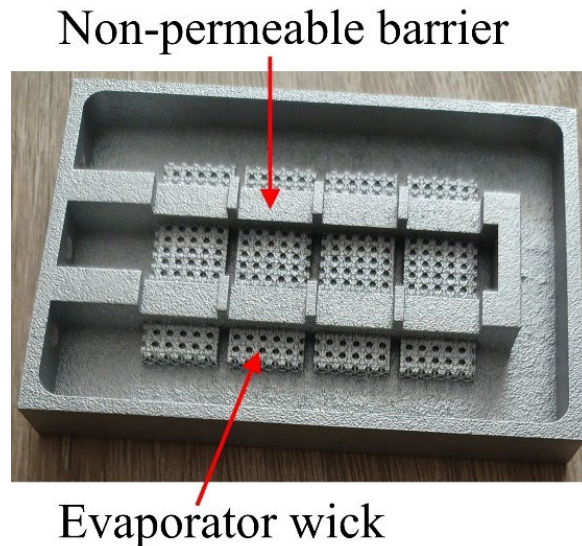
Inside the additively manufactured cold plate without the top substrate
